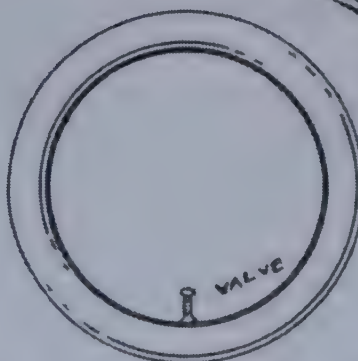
The Inner Tube is Placed Inside of the Outer Cover.
